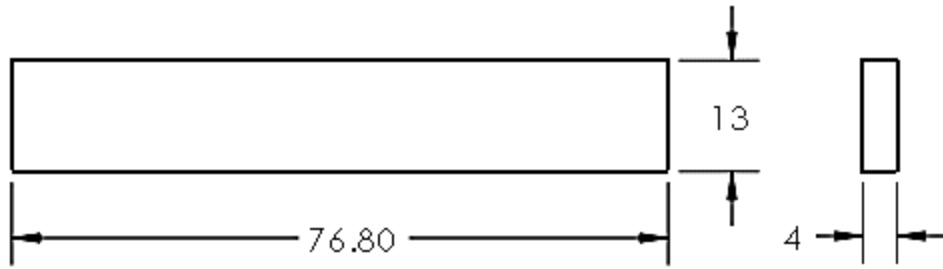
Flexural testing specimen (all dimensions in mm).
